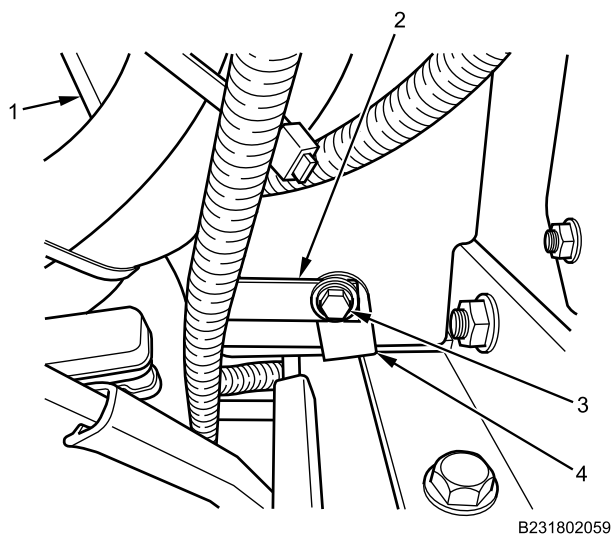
DCM Left Side Exterior Armor Lower Bolt.
